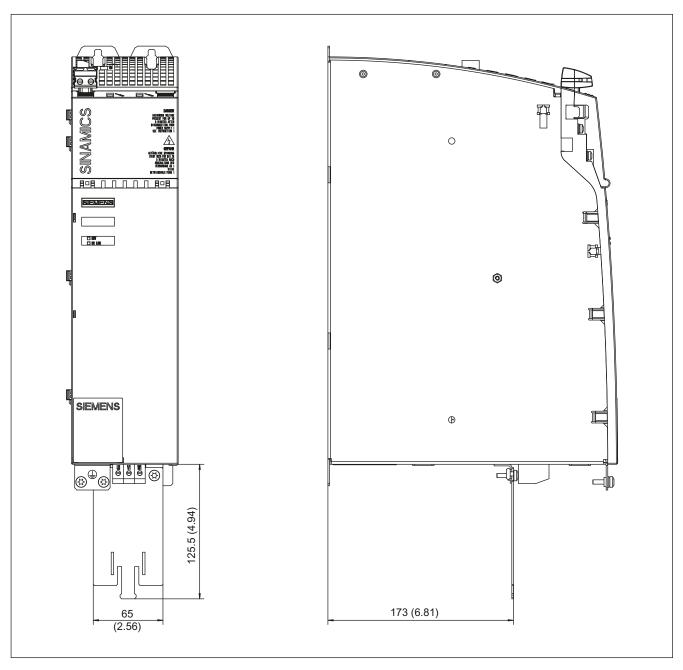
Dimension drawing of shield connecting plate on a 100 mm component with internal air cooling, all dimensions in mm and (inches)
